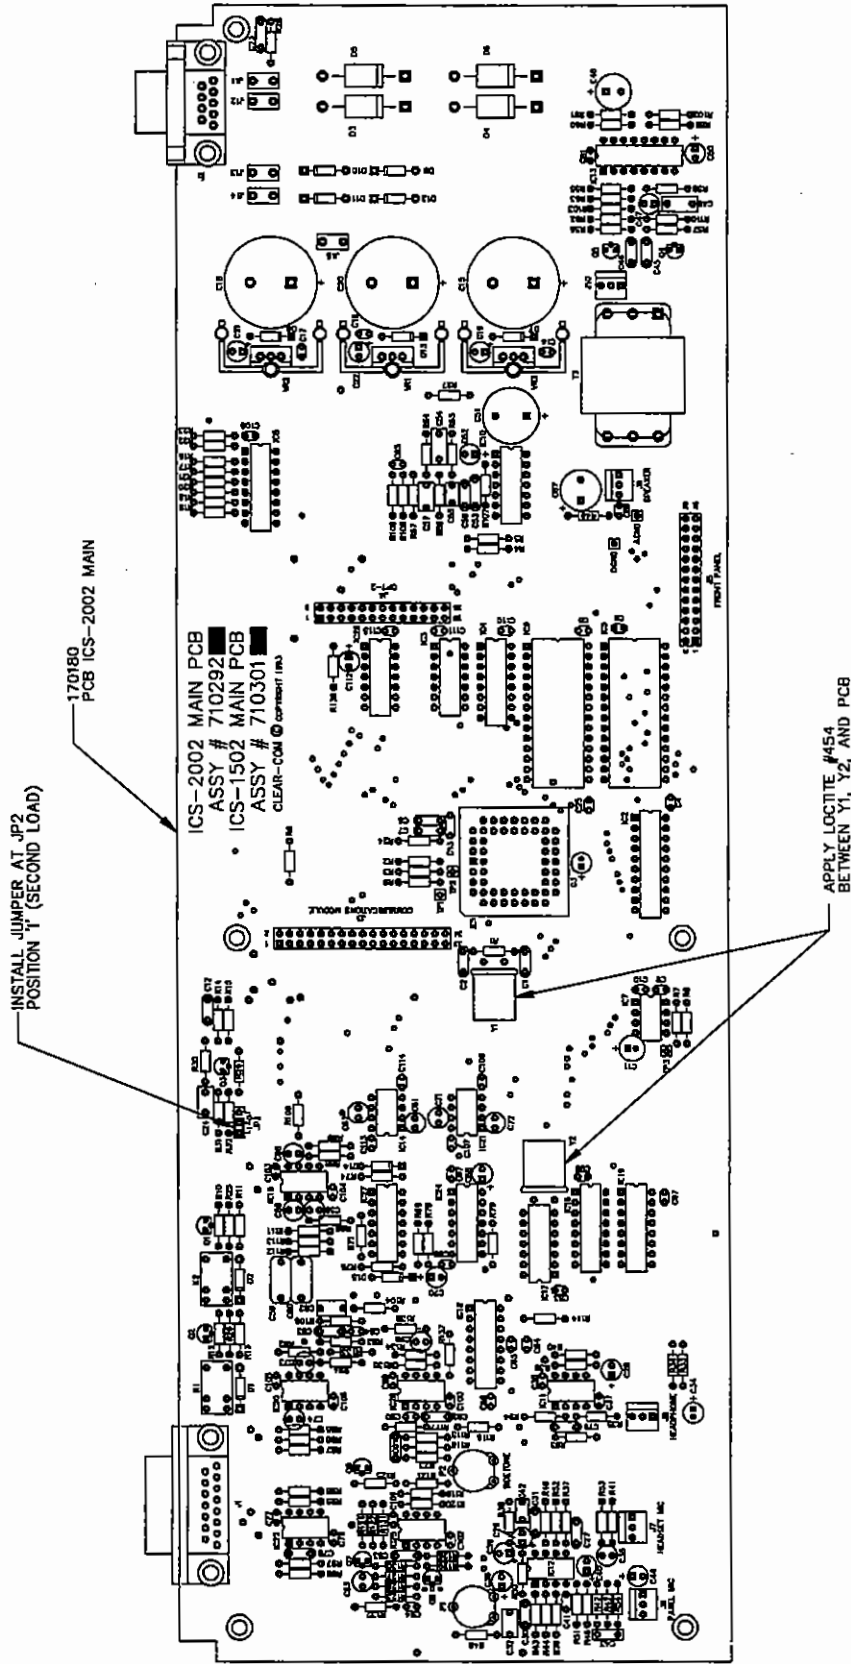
Assembly Drawing - ICS-2002 Main PCB Rev. A
